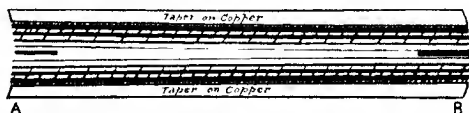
Cross-section of Roller showing Taper of Bore—A, wide end of roller; B, narrow end
